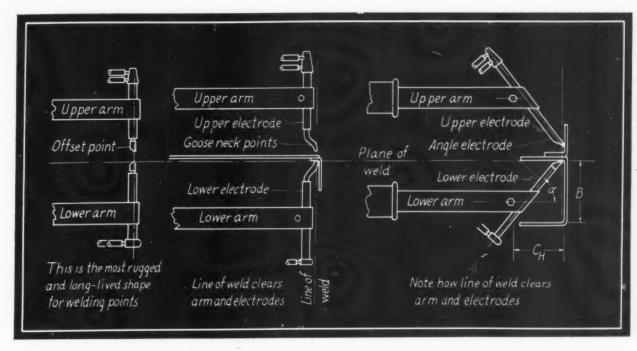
Side clearances necessary in spot welding may be reduced by the use of special welding tips such as offset points, gooseneck points or angle electrodes
